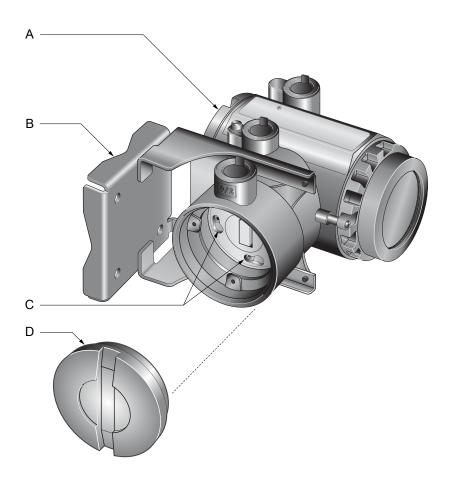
Components of a 4-wire remote mount transmitter (stainless steel housing)
